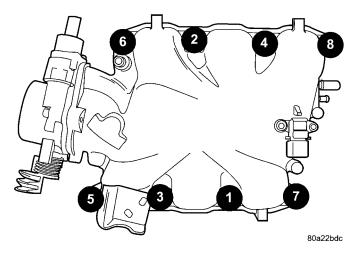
UPPER MANIFOLD TIGHTENING SEQUENCE
